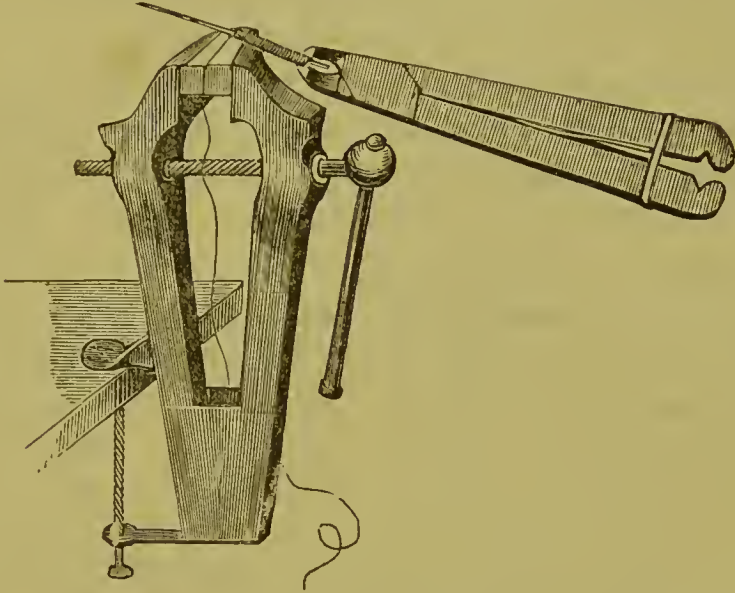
, strong pliers and bench-vise (Fig. 187) are all that are necessary for this purpose. The draw-plate should be of the hardest steel, and the holes diminishing very gradually. The pliers should be rough at the end for grasping the wire, which must be often annealed during the process.
